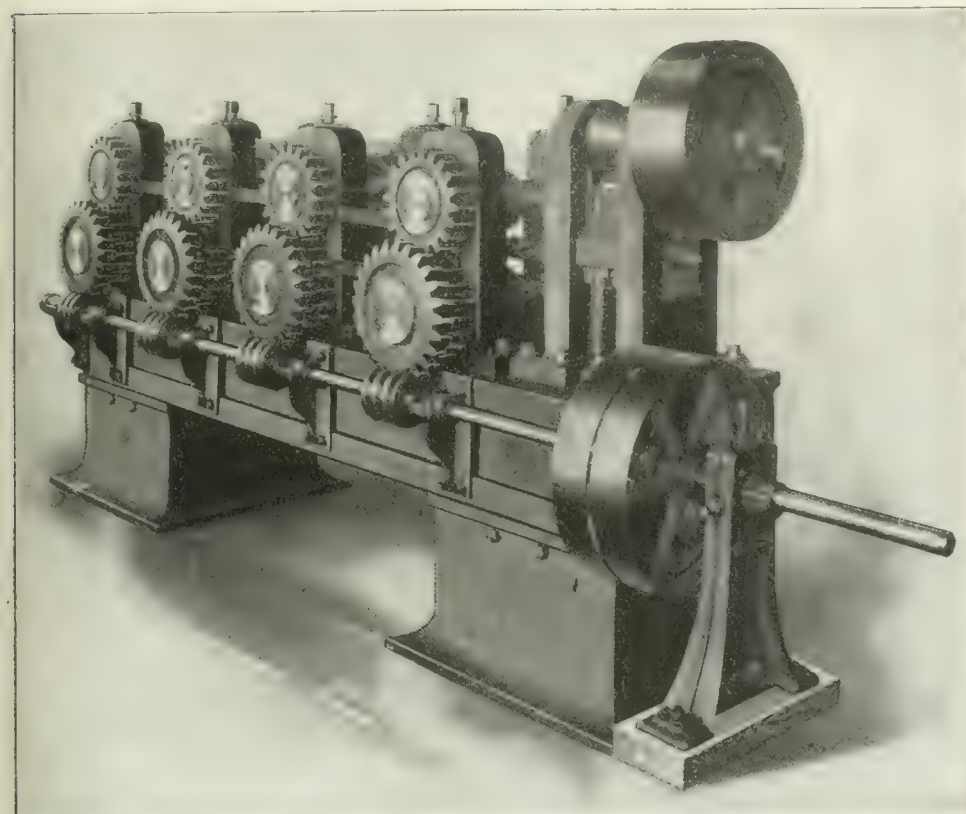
A New Machine for Making Metal Studding Built by the Wire Specialty Works, Chicago, Ill.
